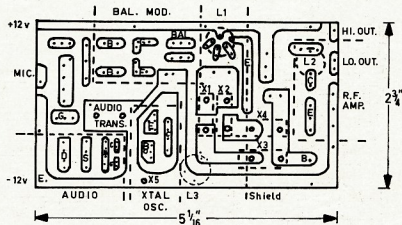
PRINTED CIRCUIT BOARD LAYOUT.
